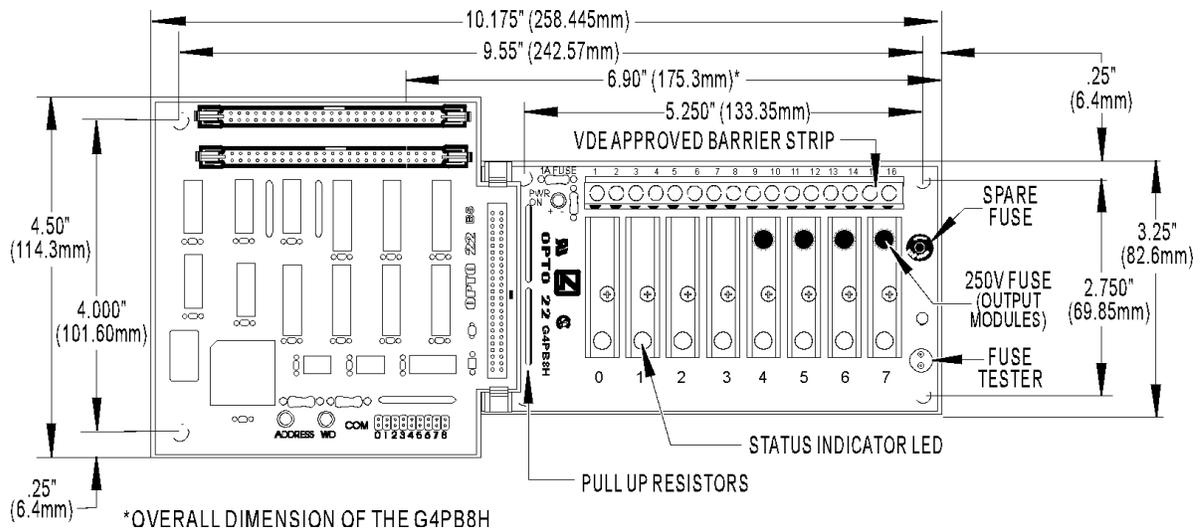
Mounting Dimensions of the G4PB8H with a B5 Installed
